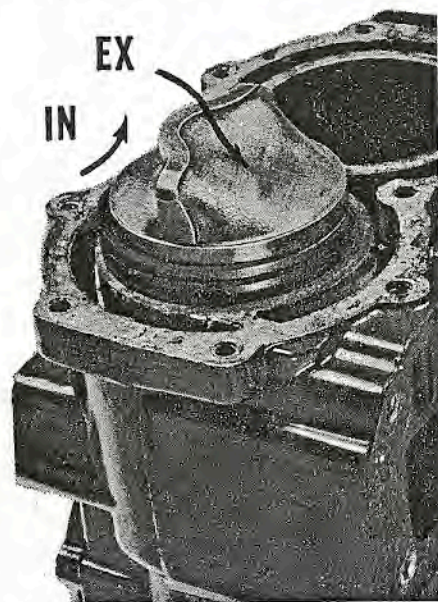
Piston correctly installed in cylinder, showing relation of piston baffle to inlet and exhaust ports.
